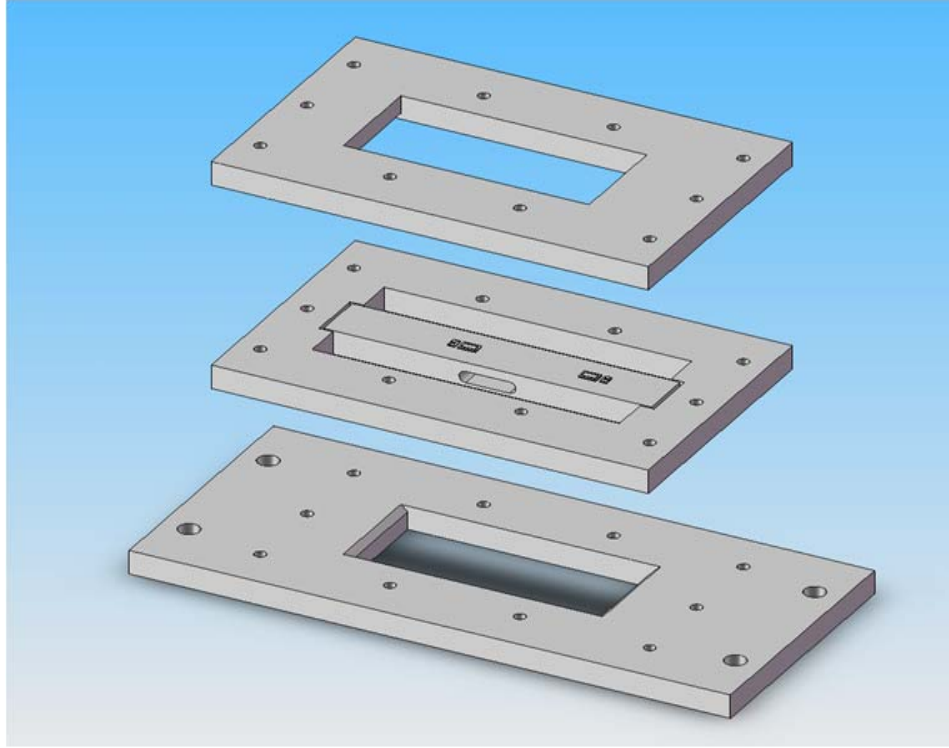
Exploded View of the Slotted Beam in Fixture
